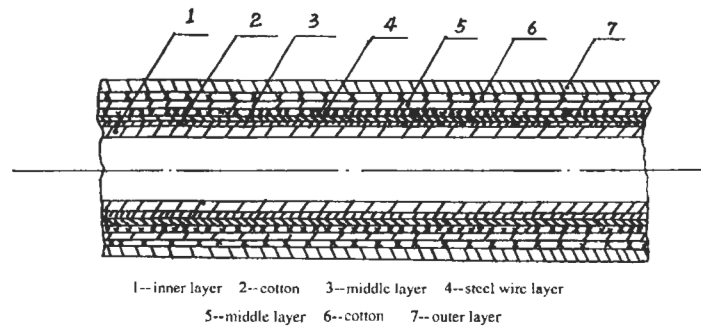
Sectional diagram of the bursting hosepipe structure.
